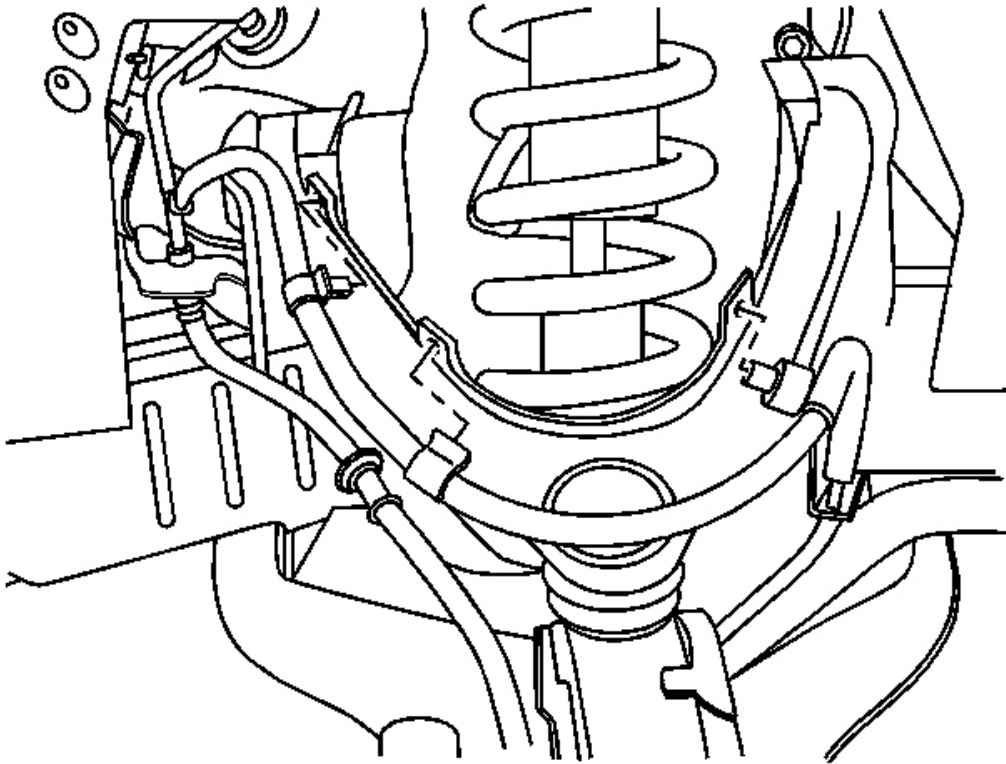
View Of ABS Speed Sensor Wiring Harness
